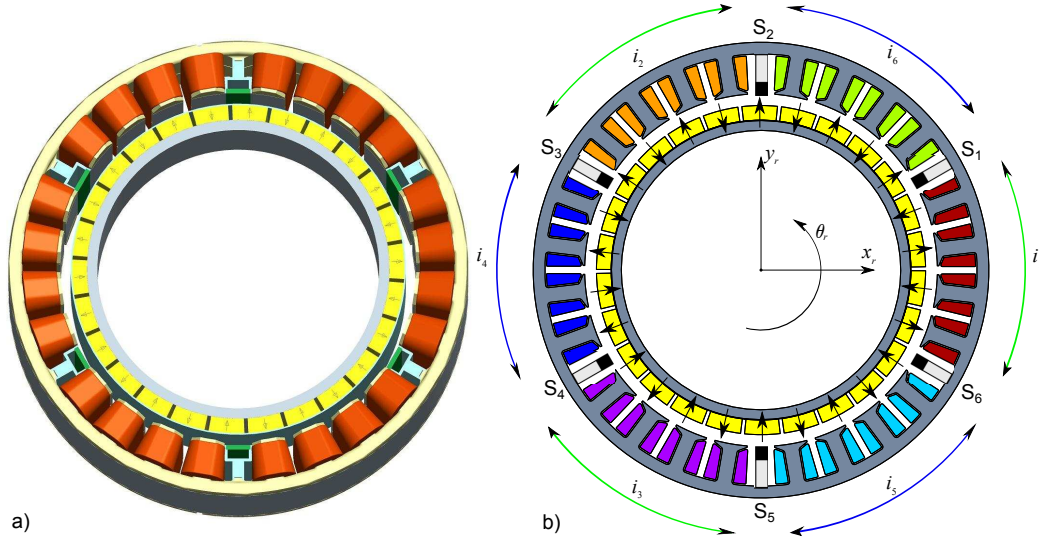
Bearingless torque motor. a) Arrangement. b) Cross section.
